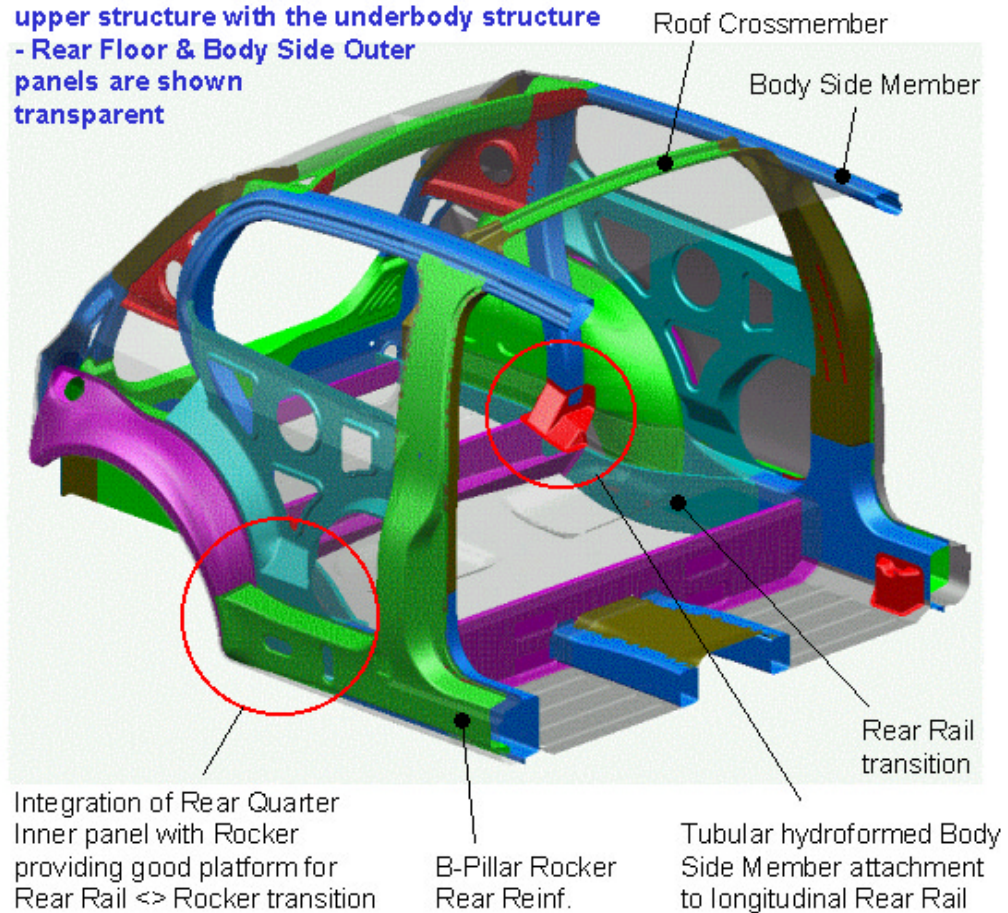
C-Class Tube Hydroformed Body Side Members _ Front View
